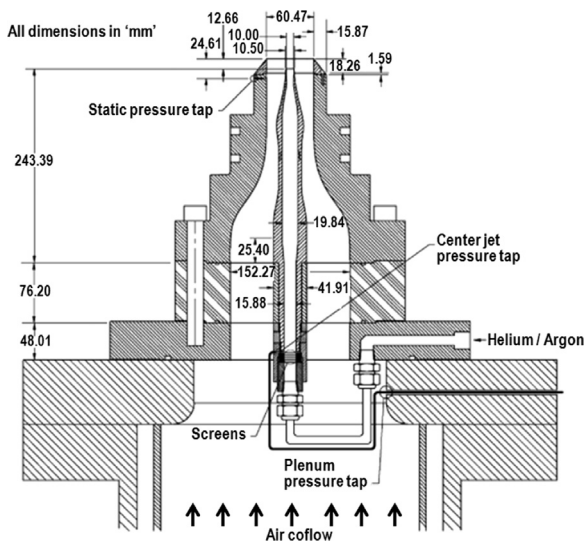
Coaxial jet-nozzle assembly (reproduced from Ref. [9]).
